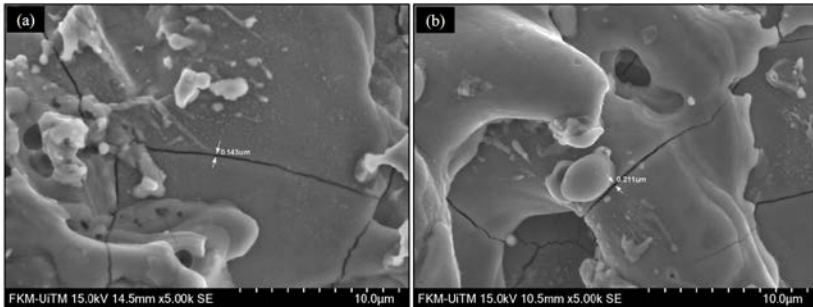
Microcracks on the machined surface (a) Test I; 0.143 um (b) Test III; 0.211 um
